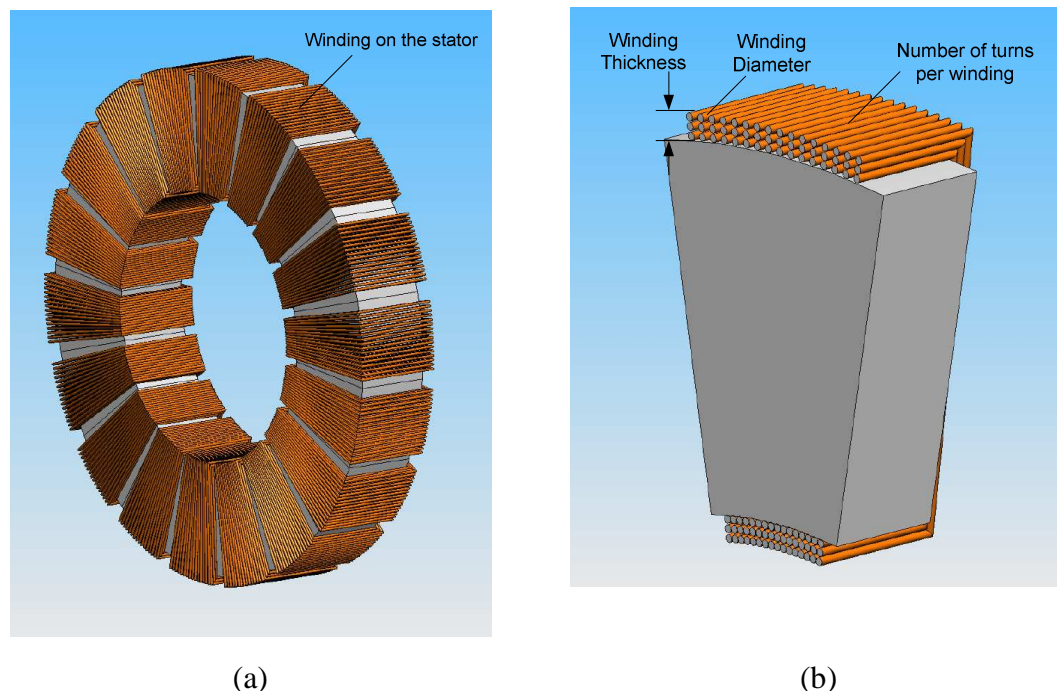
Windings on the stator (a) and the winding's cross-sectional view (b).
